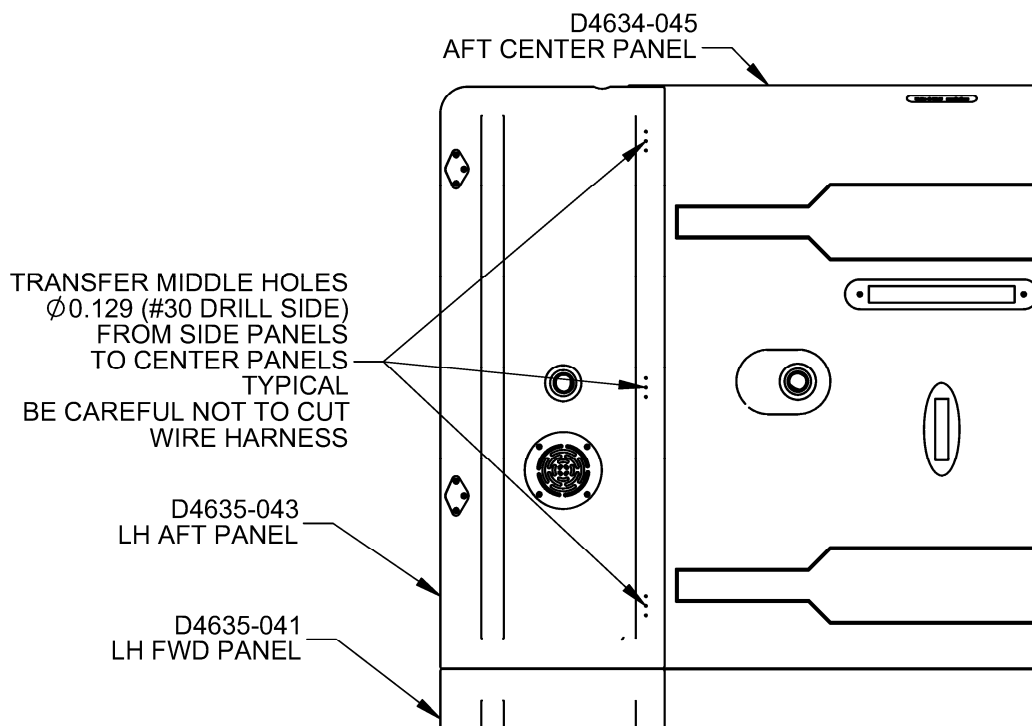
Transferring Holes from Side Panels to Center Panels (D4635-043 Shown)
